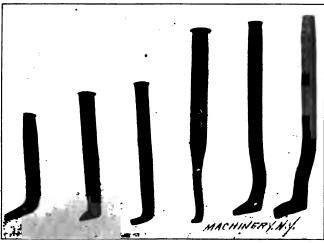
Staking Tools Used for Repairing Worn and Cracked Drop Forging Dies
